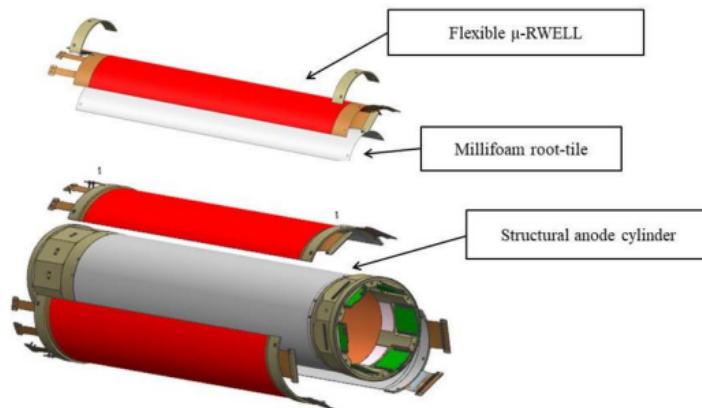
Sketch of the assembly of the three roof-tile detectors on the anode cylinder. The anode cylinder is made of composite material: an FR4–Millifoam<sup>®</sup>–FR4 sandwich plus an additional finely machined layer of Millifoam<sup>®</sup>.
